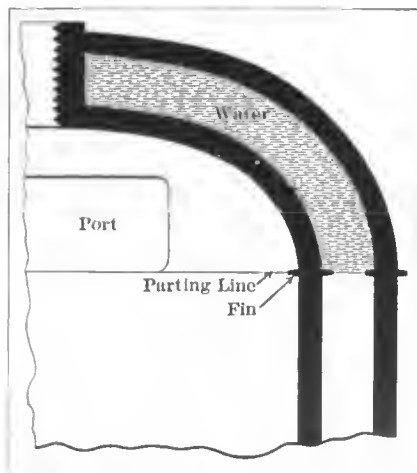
Fin, at parting line, the product of warped patterns or inferior moulding
